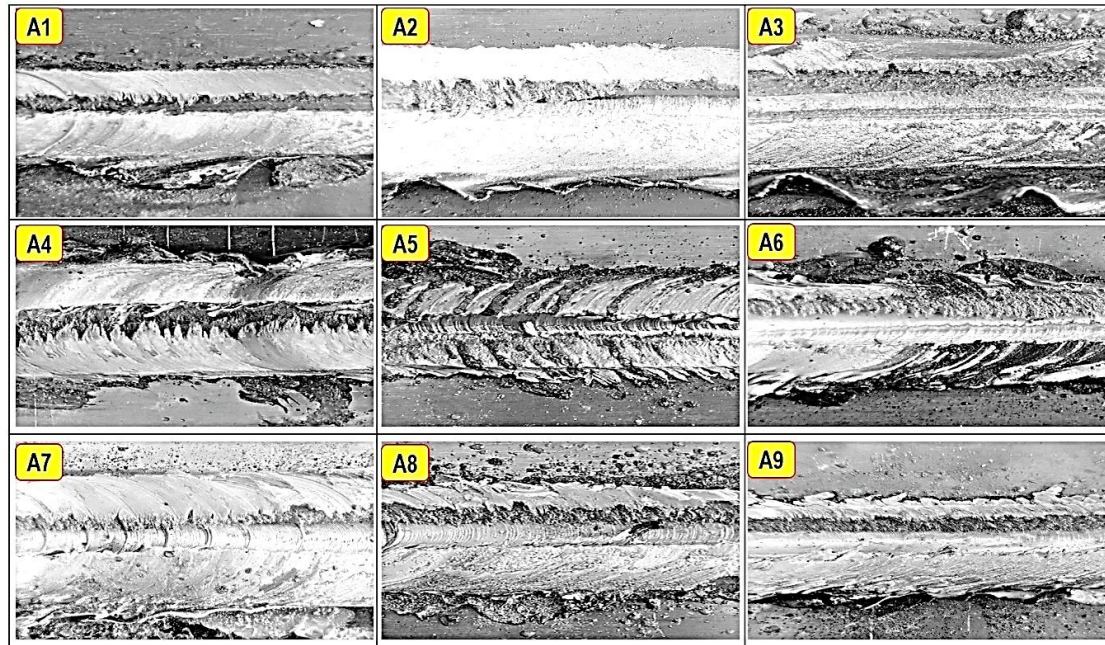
Weld top surface of PVBFSWed AA7075-T651 joints
